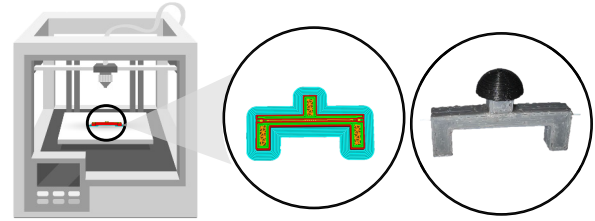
Fabrication step with a zoom on the printed layer (i.e., the 21st one) with the channel for the FBG embedment and the final prototype of the 3-D-printed sensing unit.
